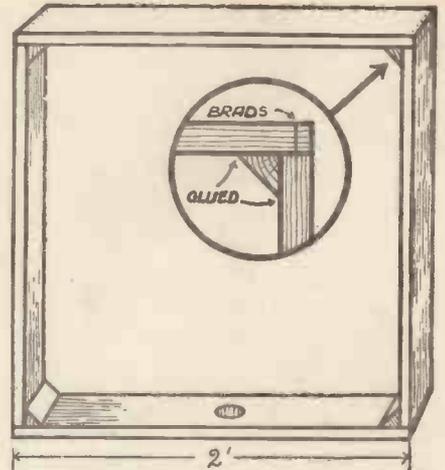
How the Frame Aerial is assembled. Inset gives details of the Corner Joints.
